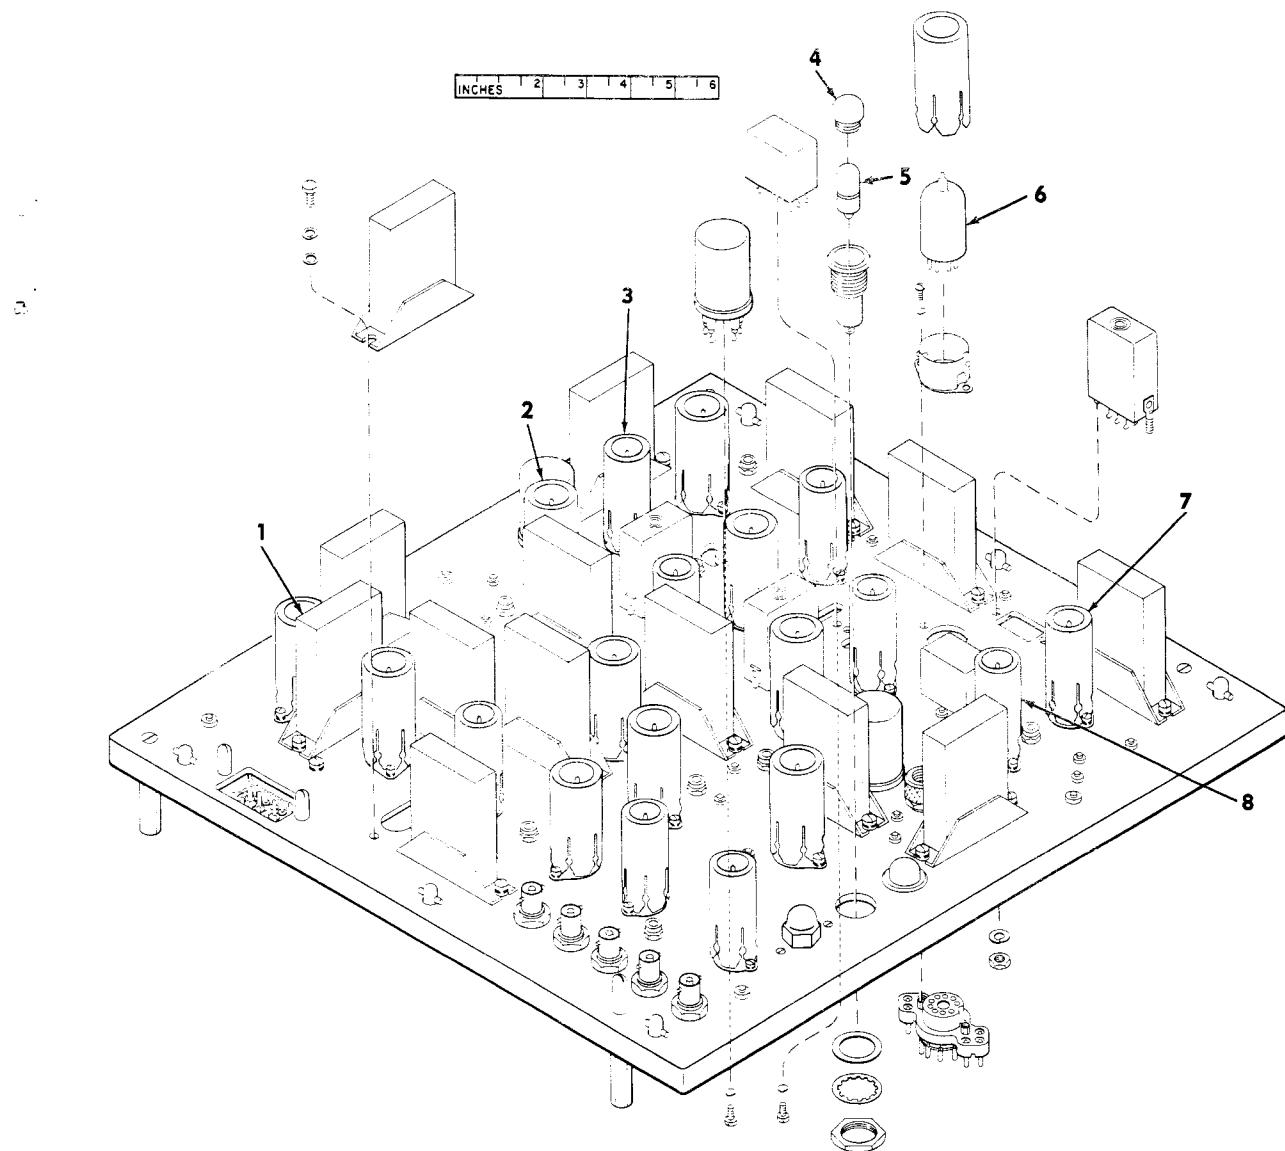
Coder, radar, guided missile (8159349) – partial exploded view
